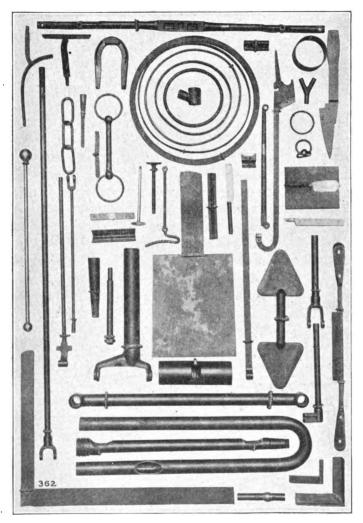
Samples of Butt Welding Courtesy of Toledo Electric Welder Company
